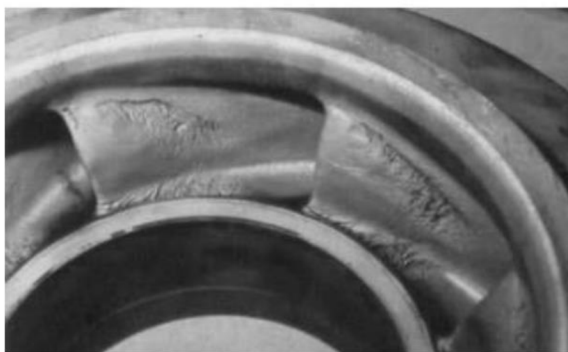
Cavitation erosion in a centrifugal pump impeller.
